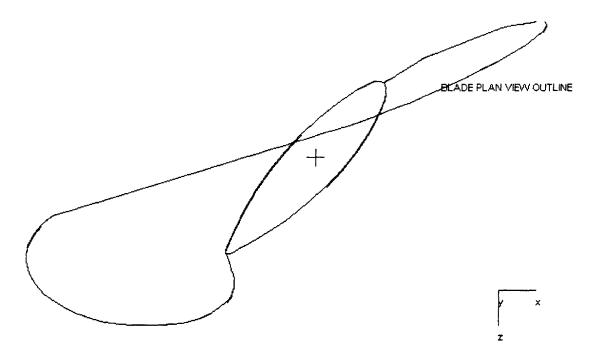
Plan View Outline of TRUMP Propeller Blade
